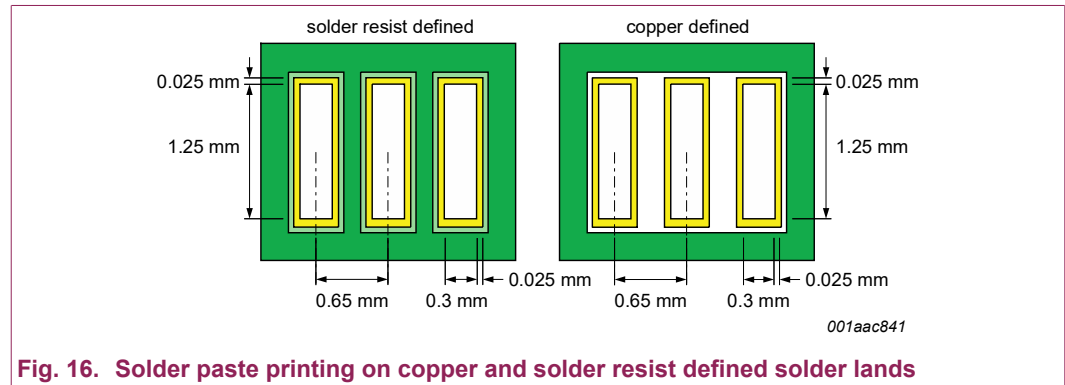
Solder paste printing on copper and solder resist defined solder lands
